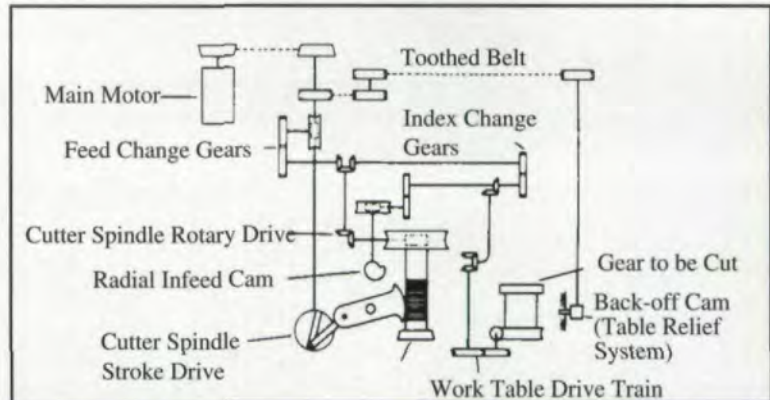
"Old Style" table relief machines with numerous drive trains necessitated by having a single drive motor.
